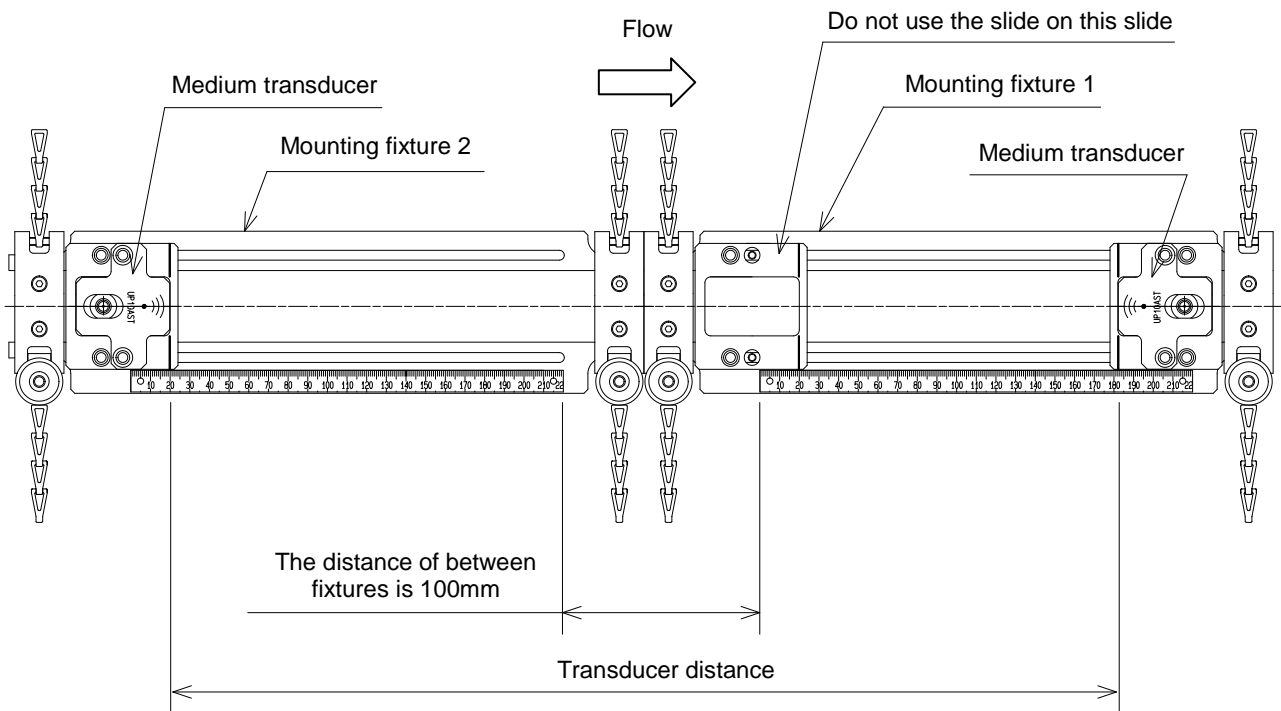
Combine mounting fixture (over DN200mm)
